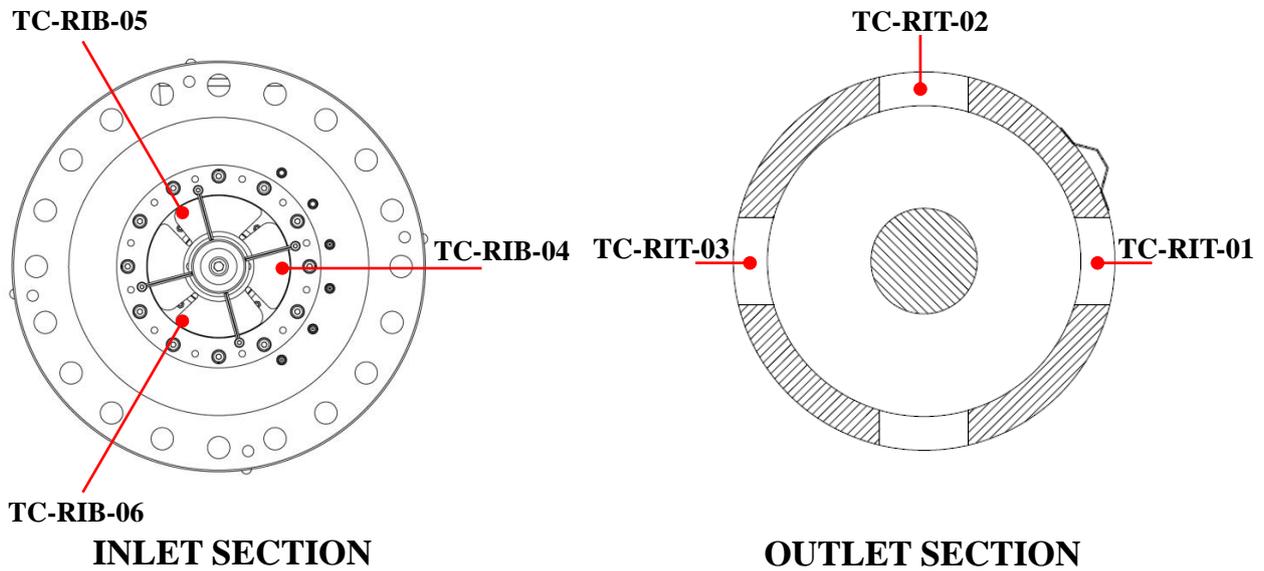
Riser-pump TCs positions at the inlet and outlet section
